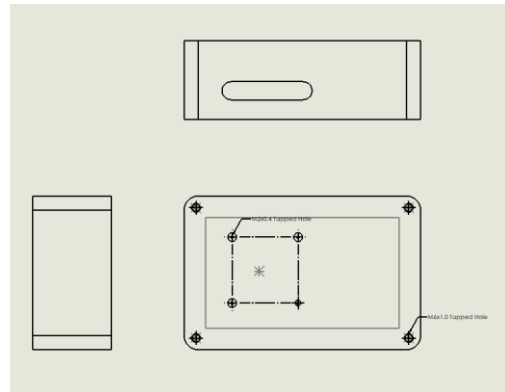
Bottom Enclosure Drawing in SolidWorks
